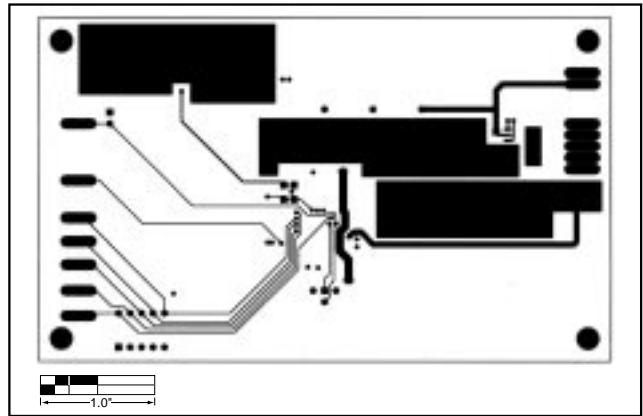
MAX1624 EV Kit PC Board Layout—Solder Side
